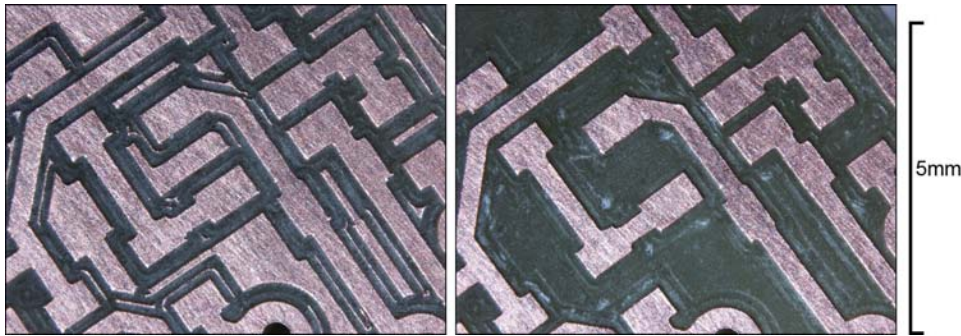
Milled PCB (left) and the same PCB after removal of the excess copper (right).
